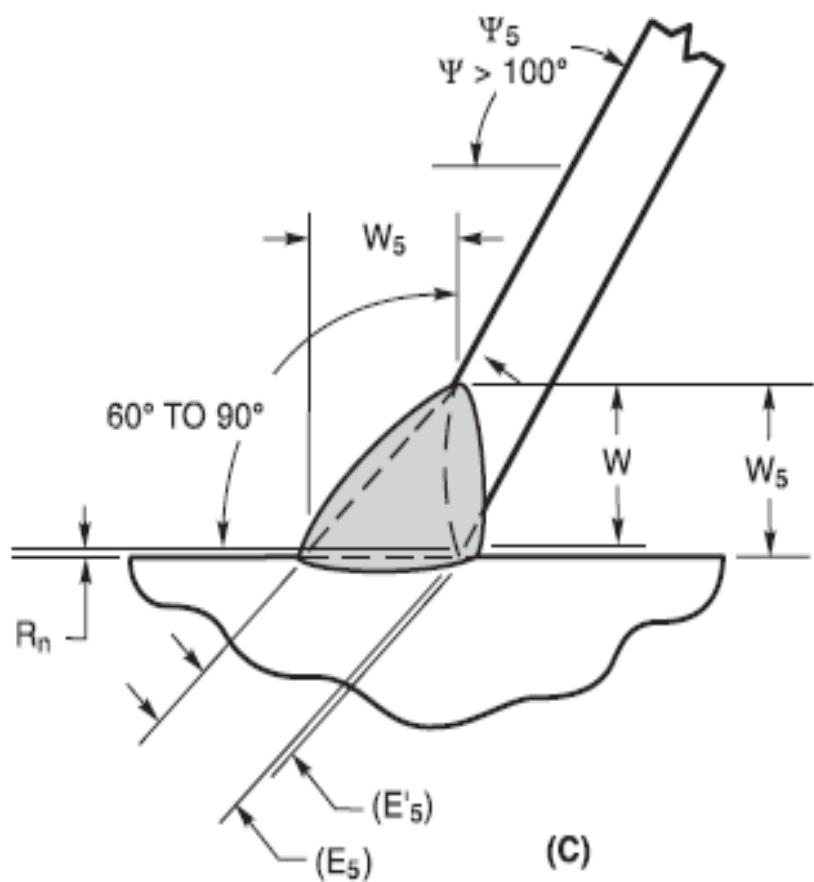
(Continued)—Prequalified Fillet Weld Joint Details
